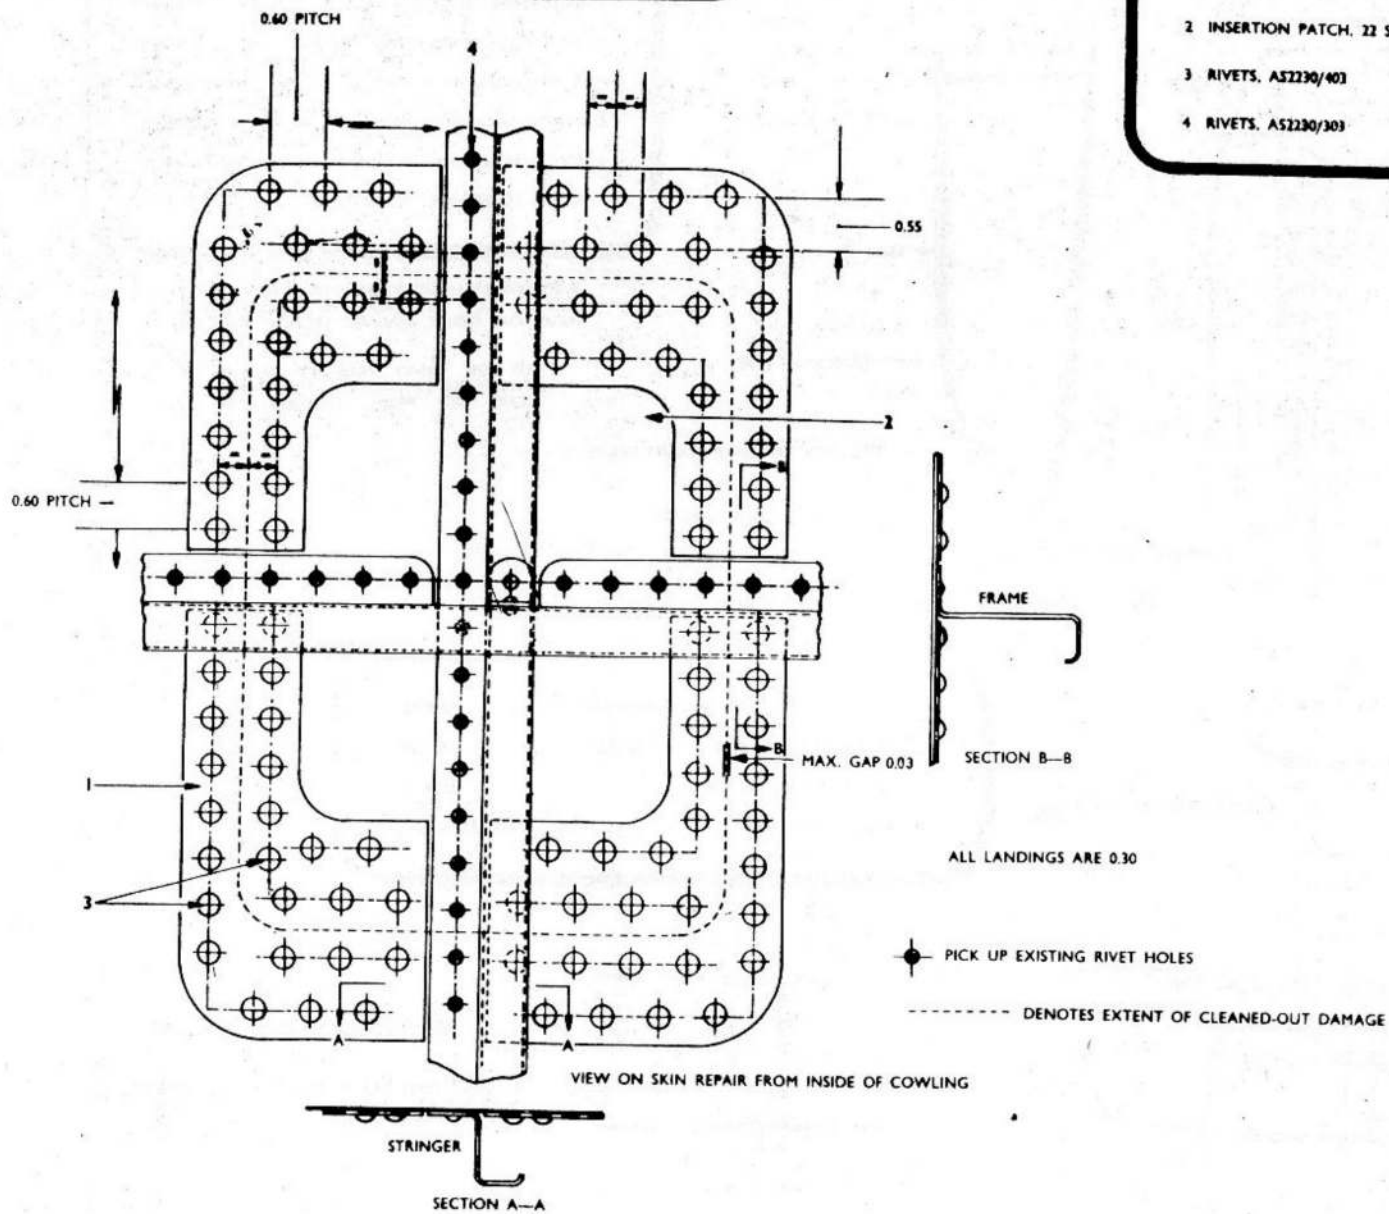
Flush skin patch crossing a stringer and frame—front cowling
